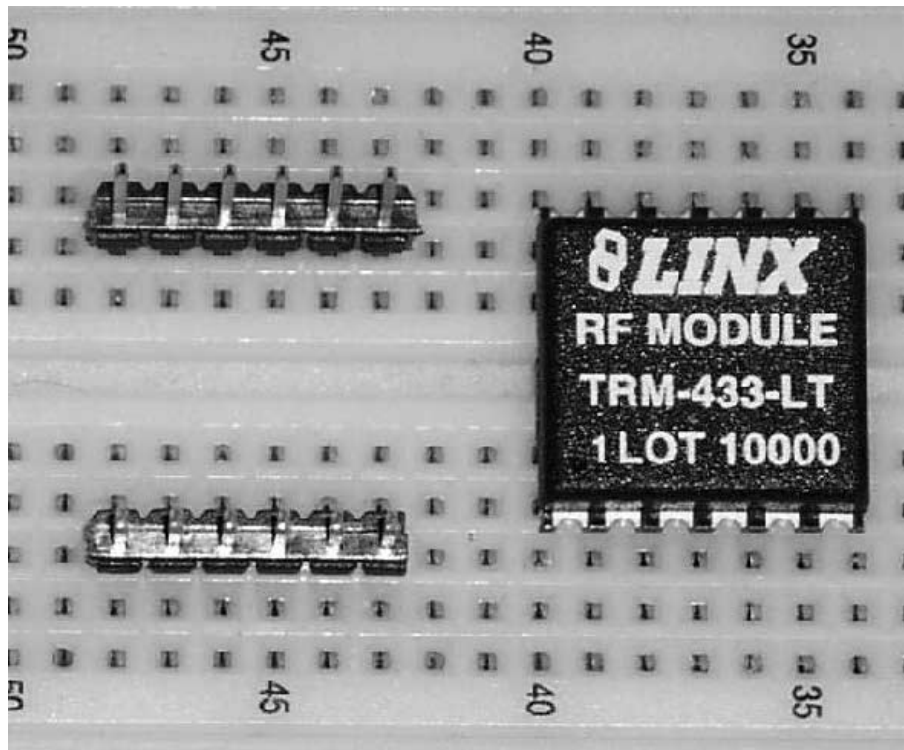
Use header pins soldered to the SMD device to make it manageable.
